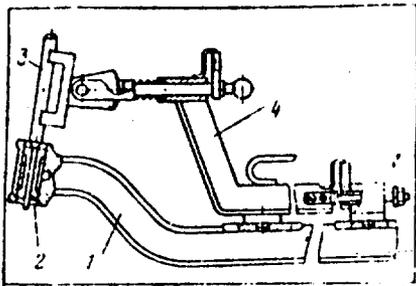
Checking the Front Bridge Beam for Bending and Twisting.
